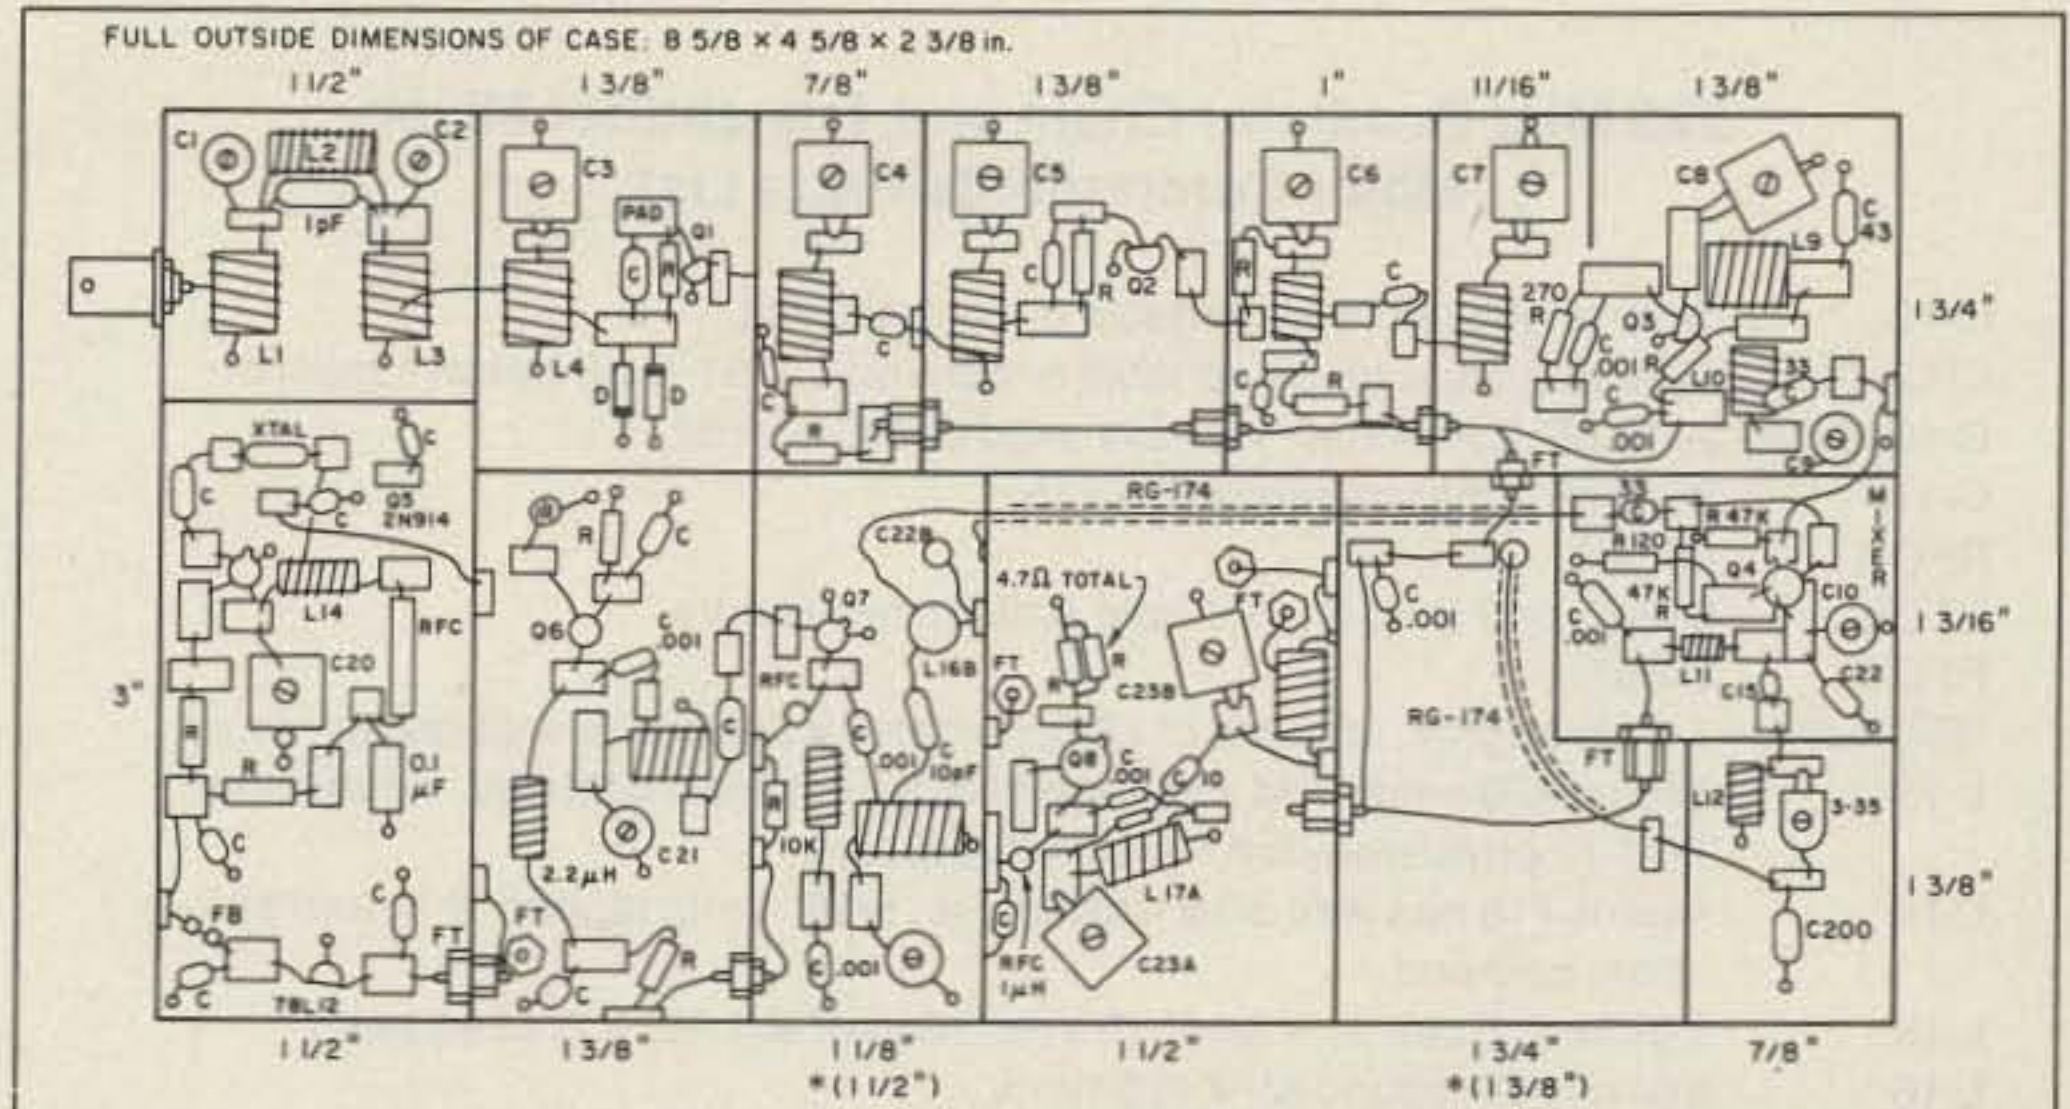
Major parts positioning (approximate dimensions) for the receiver and oscillator, top section.
